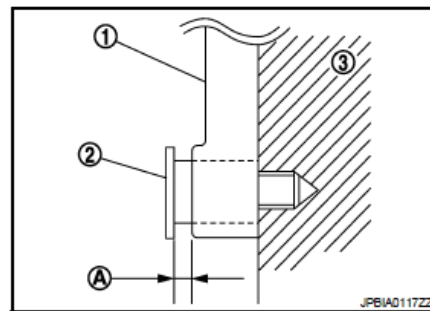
Identifying Gap Between Slack Guide And Cylinder Block
